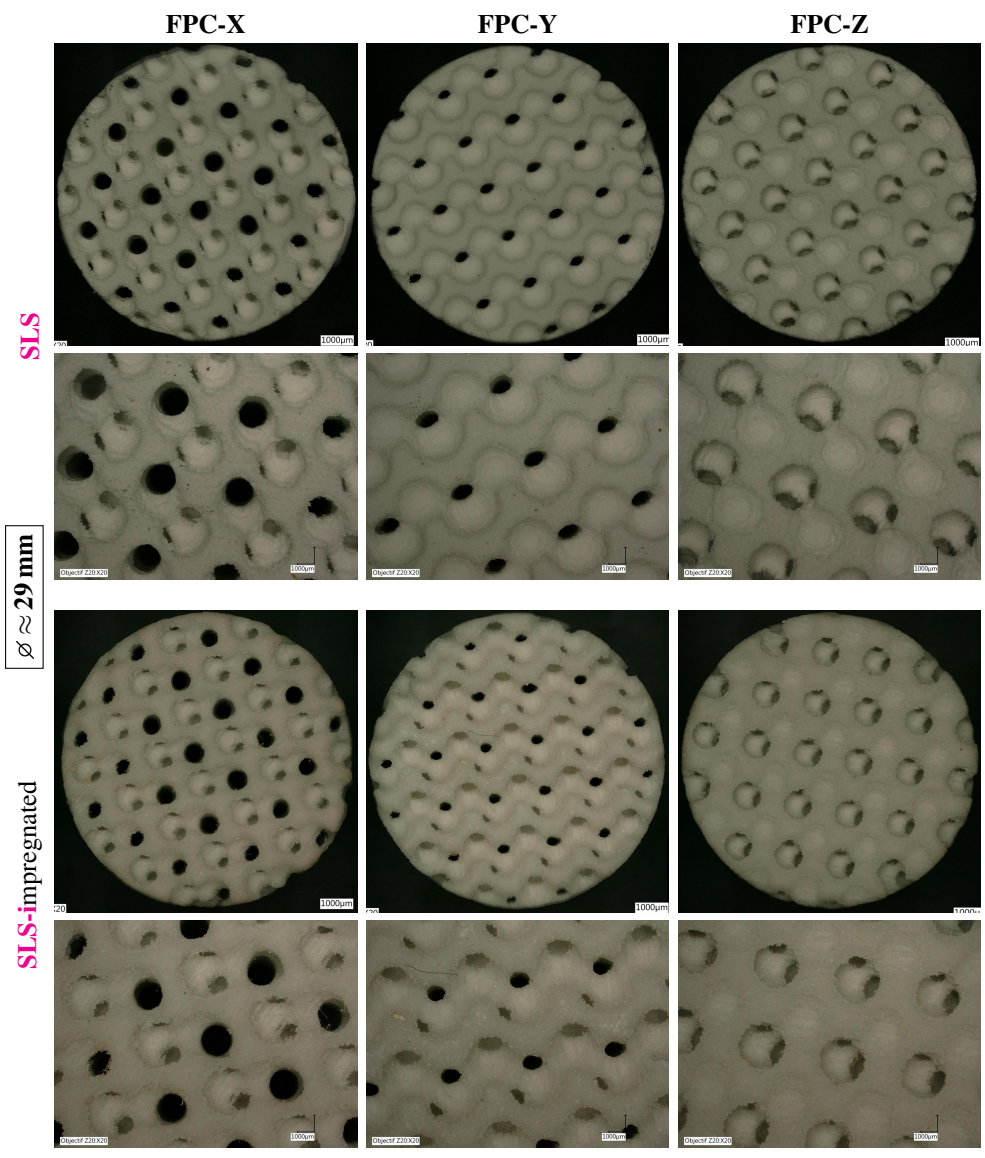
FPC samples ($\varnothing \approx 29$ mm) manufactured by UTC using SLS technology
